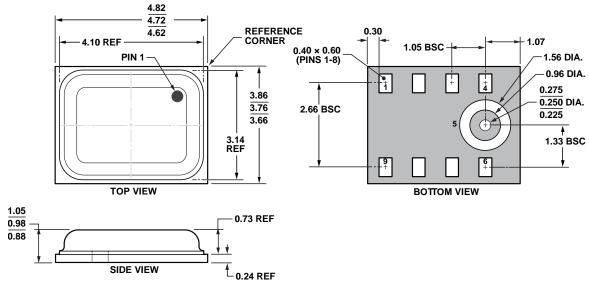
9-Terminal Chip Array Small Outline No Lead Cavity [LGA_CAV] 4.72 mm × 3.76 mm × 1.00 mm Body (CE-9-1) Dimensions shown in millimeters
